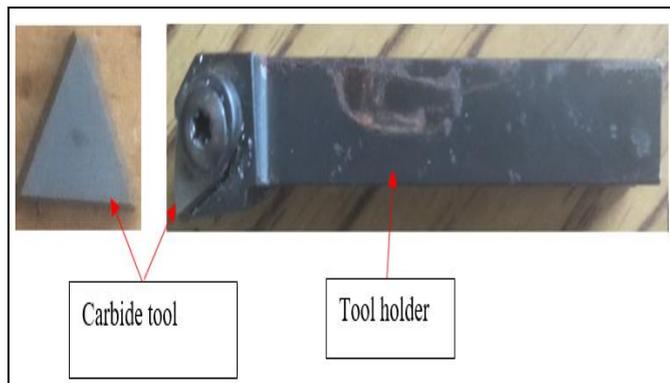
P25 Carbide Tool and CTGNR1212F11 Toolholder Set
